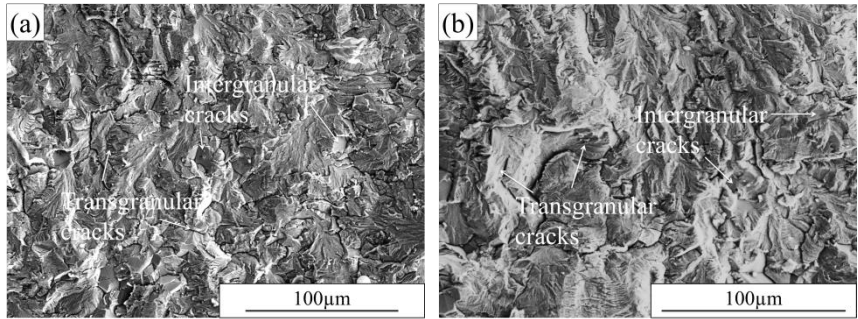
Fracture surfaces after exposure with 50MPa four-point bend load: (a) ground-RD specimen, (b) as-delivered specimen.
